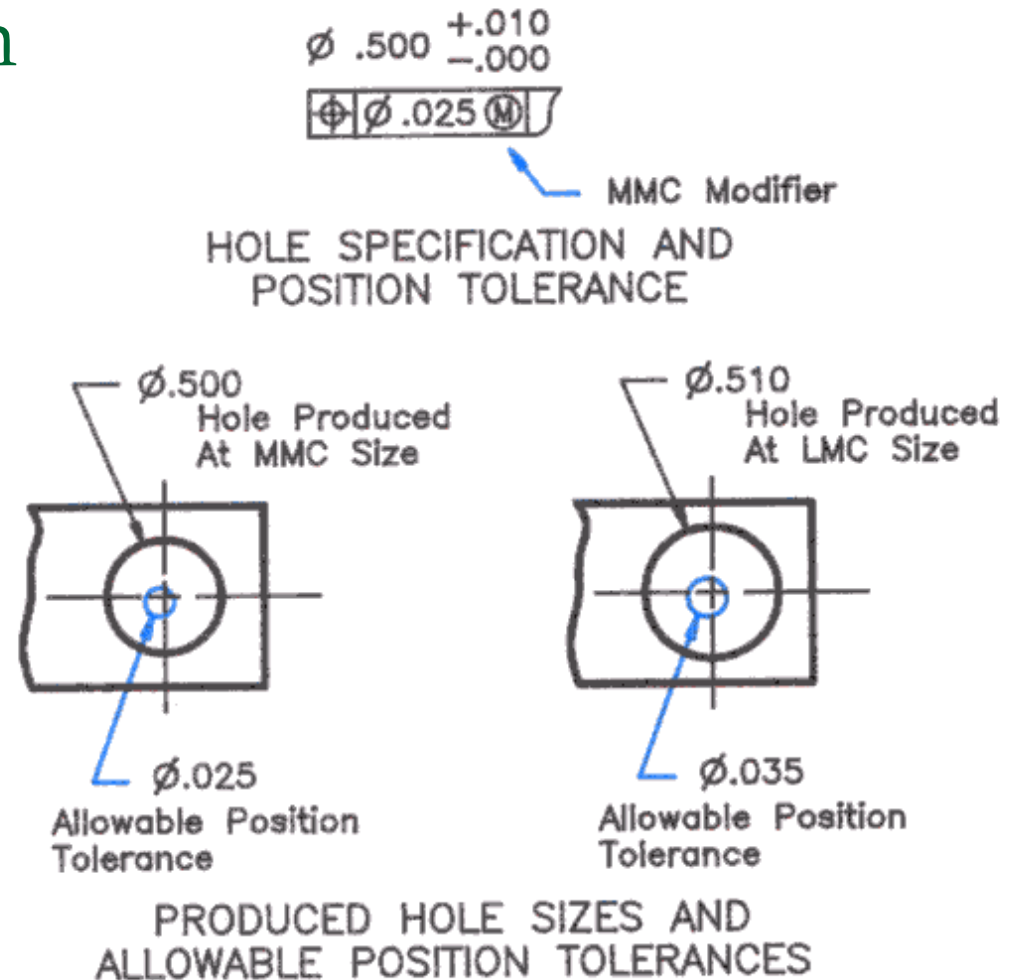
The position tolerance zone increases in size when the produced feature size departs from MMC and the MMC modifier is applied to the tolerance specification.
